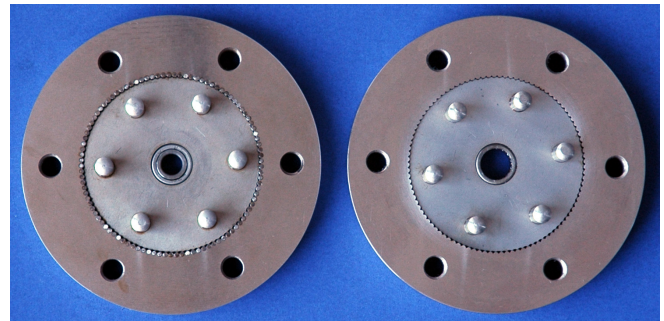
Two 100:1 cycloid drives. Left: Externally housed rollers, similar to Fig. 4b. Right: Fused rollers, similar to Fig. 4c.
